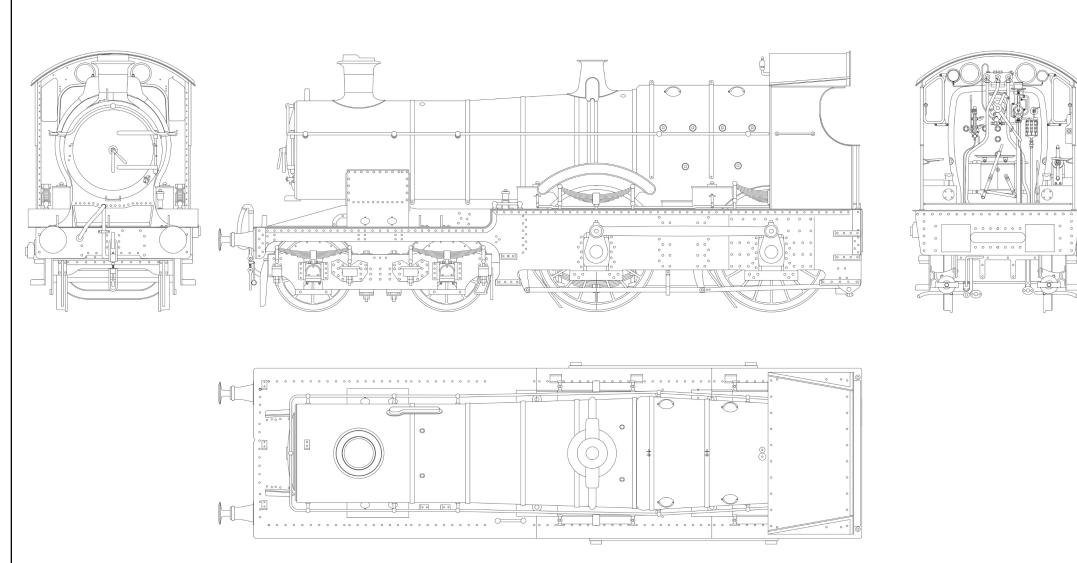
Bird, showing D3 boiler, long smokebox, top feed, steam reverser, deep frame bogie, plain coupling rods, large cab cut-out, steel roof with slanting rain strips, four sandboxes on footplate.
